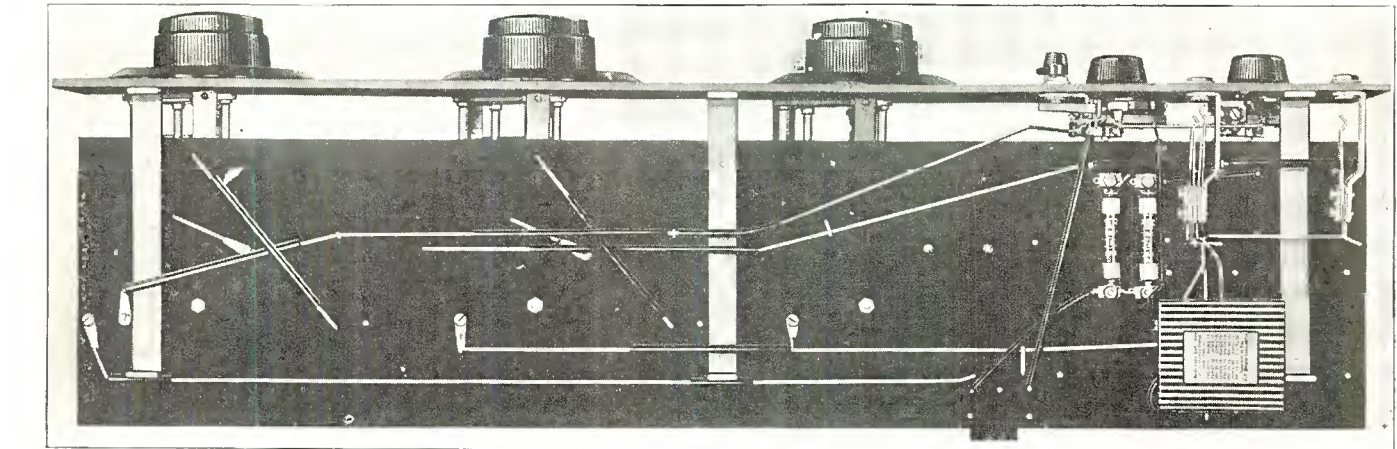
Bottom view of receiver showing arrangement of parts secured to subpanel
